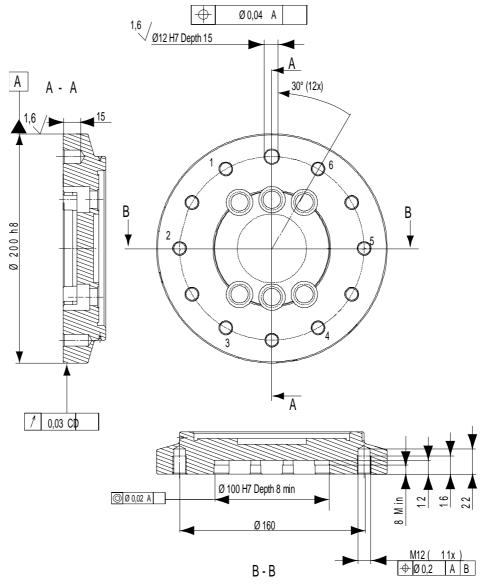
Robot tool flange SS-EN ISO 9409-1:2004 (dimensions in mm).
